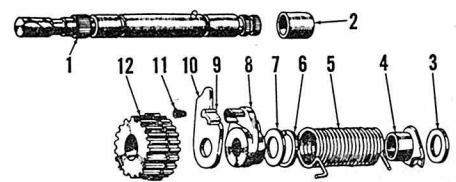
Exploded view of automatic clutch used on HM/S model.
